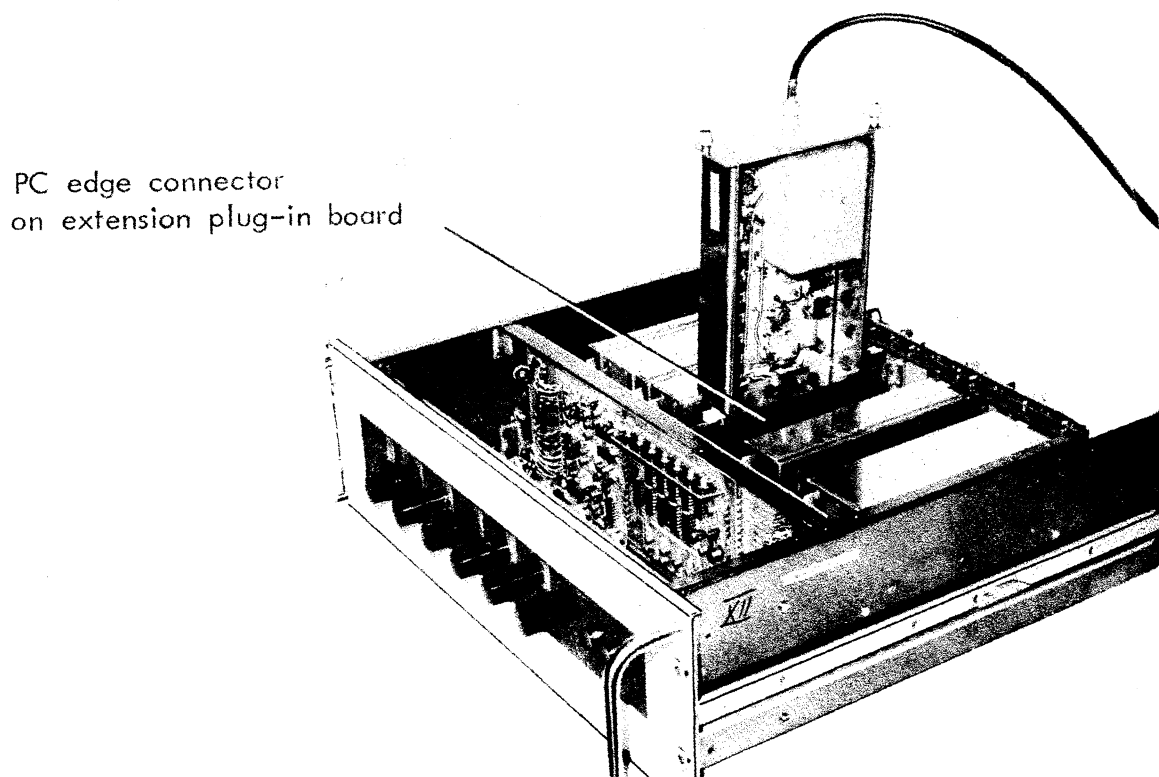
Plug-in Module mounted on an Extension Plug-in Board.
